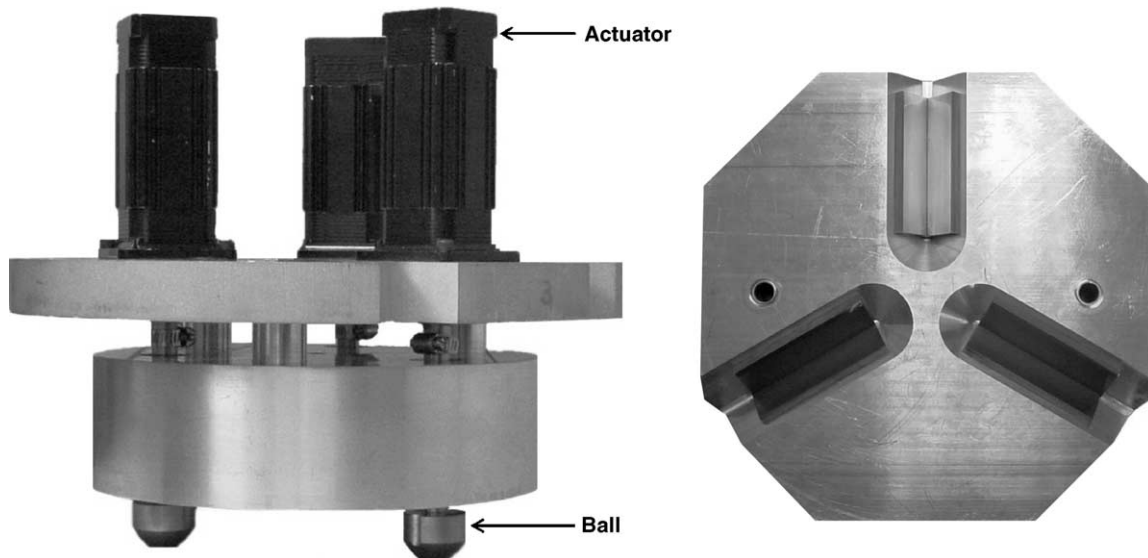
Major sub-assemblies of eccentric ball–shaft prototype. Left: eccentric balls with linear-rotary actuators. Right: grooved pallet.
